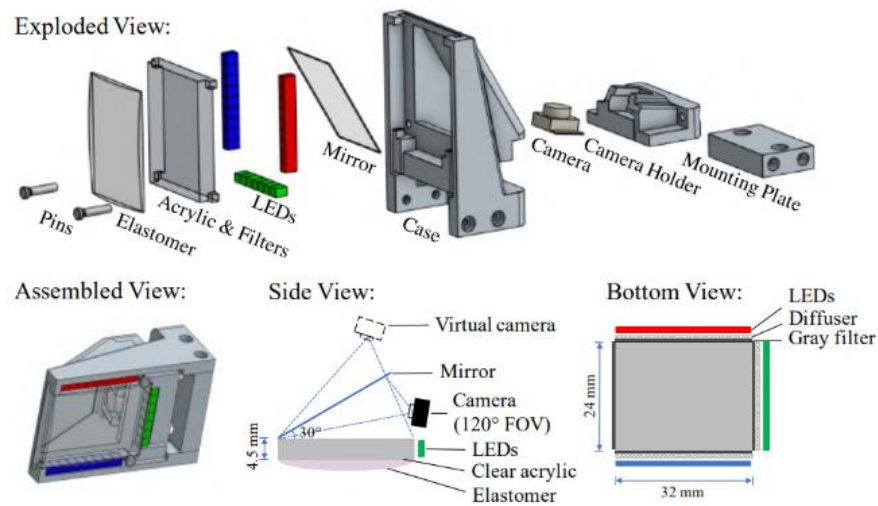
Sensor design, including the exploded view showing inner components, the assembled CAD model, and the schematics.
